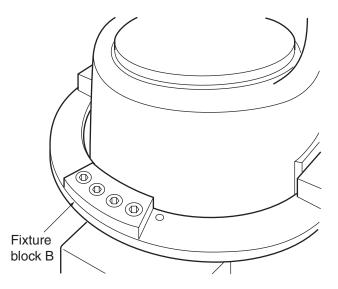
Fixture Block B Joining Assemblies 1 and 2
